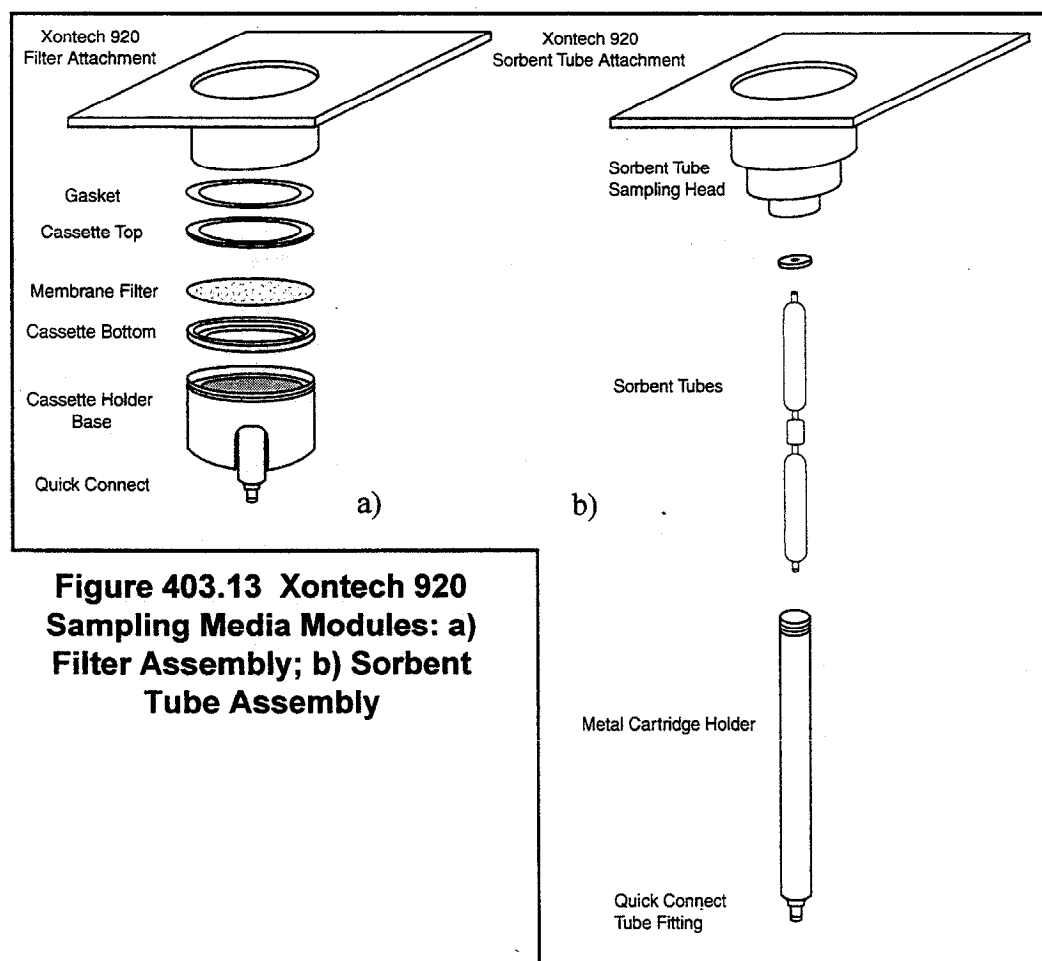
Xontech 920 Sampling Media Modules: a) Filter Assembly; b) Sorbent Tube Assembly
